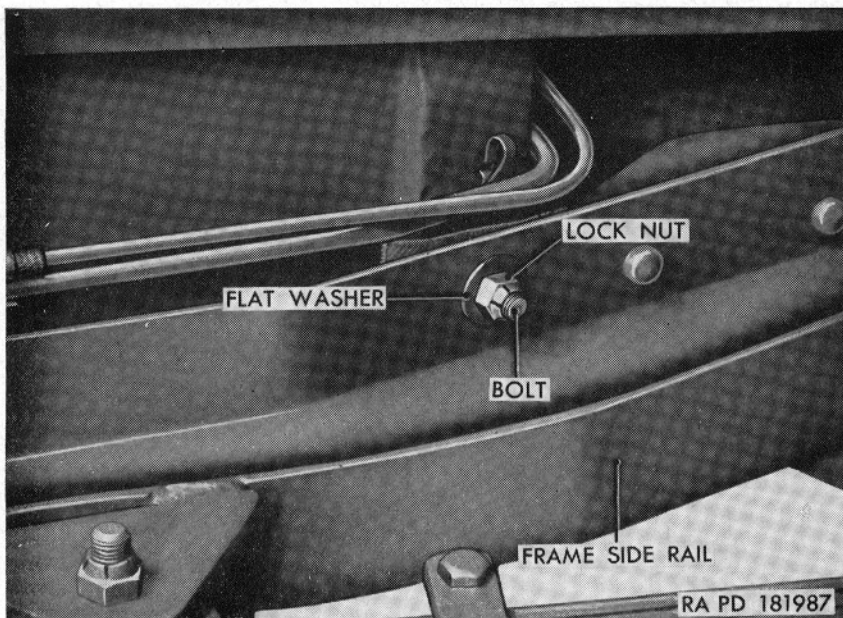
(Added) Body hold-down bolts M170—frame side rail.
